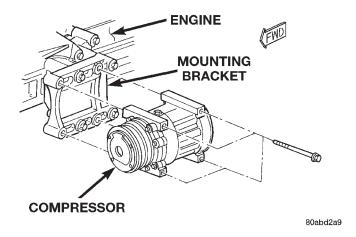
Compressor Remove/Install - RHD 4.0L Engines
